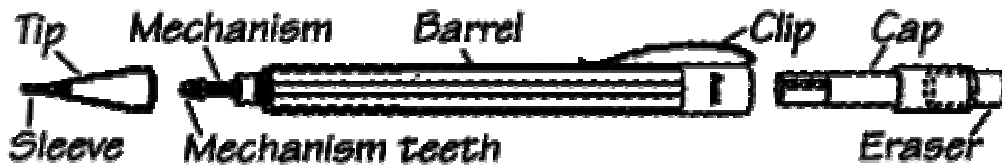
Exploded view of the mechanical pencil highlighting the four modules: cone/tip, clutch/teeth, barrel, and eraser.
